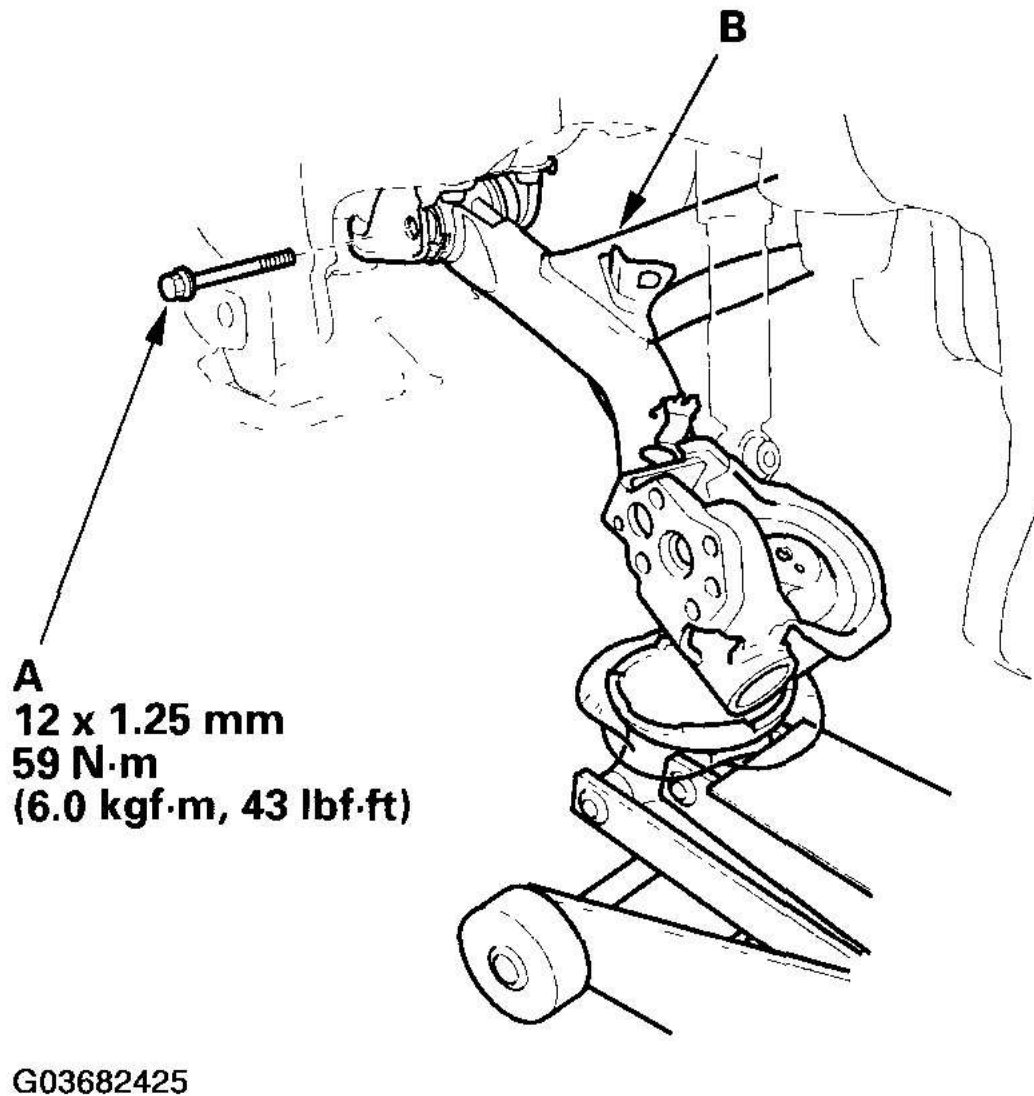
Removing Rear Axle Beam Mounting Bolts And Torque Specifications
